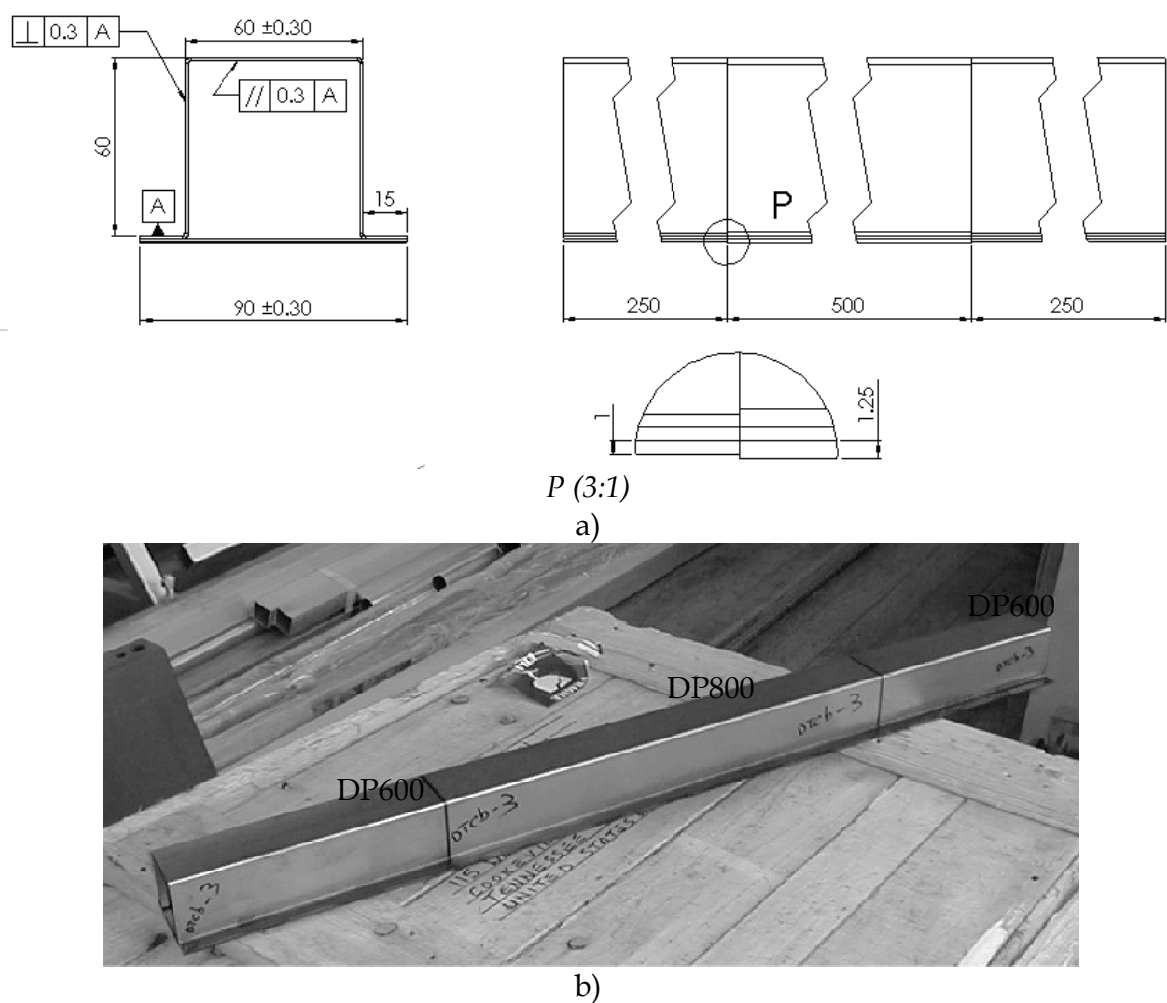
a), b). Details of tubes manufactured using tailor welded blanks
